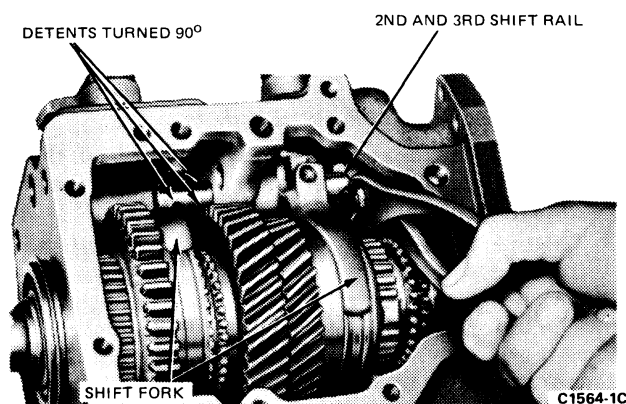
Rotating Second- and Third-Speed Shift Rail
